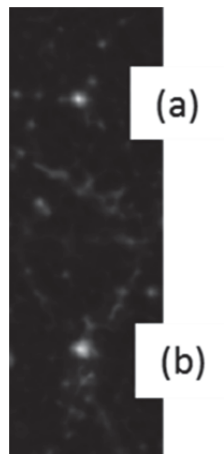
Sample L-41 C-Scan as-manufactured top surface with roughness of 11.1 μm RMS (a) 0.508 mm defect (b) 1.016 mm defect
